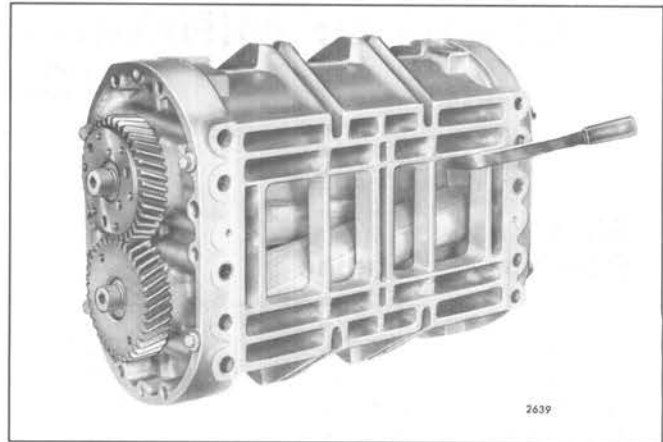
Measuring End Clearance Between Blower Rotors and End Plate
